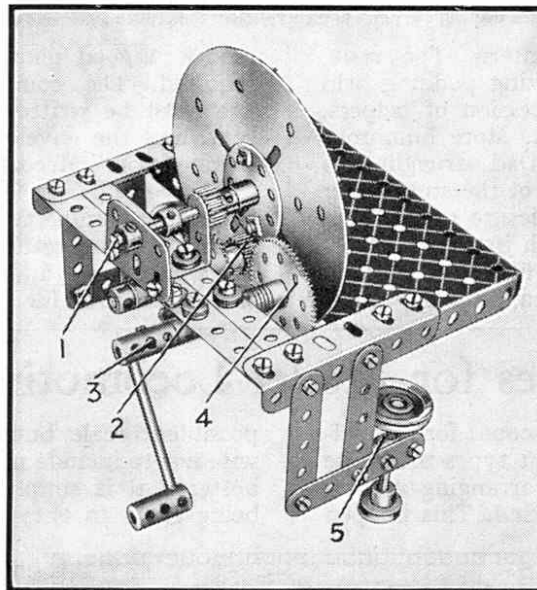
A disc sandpapering machine that can be used for smoothing small pieces of wood, or for sharpening pencils.
